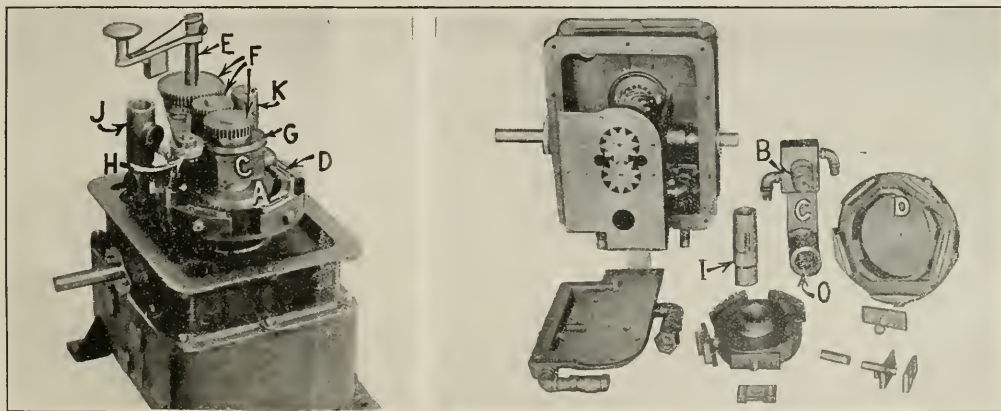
CONTROL BOX WITH COVER REMOVED AND ITS WORKING PARTS
